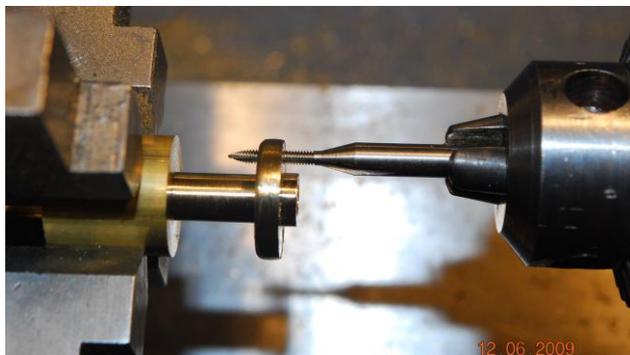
The collet is roughed out oversize, center-drilled and reamed to 1/8". The three wheel mounting screw holes are located, drilled and tapped 0-80. Using the milling spindle to hold the tap while turning by hand ensures the holes are straight and reduces the chances of breaking the small tap. This is a spiral-point tap, which pushes the chips out ahead of the tap and keeps the flutes from clogging. The results are faster tapping since the tap does not need to be backed out frequently to clear the chips, cleaner threads and less chance of breaking the tap.
